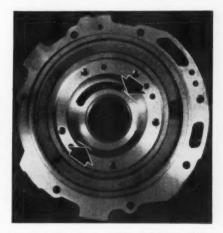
Front pump. Arrows indicate grooves cut in rotor pocket to smooth out pump action.
